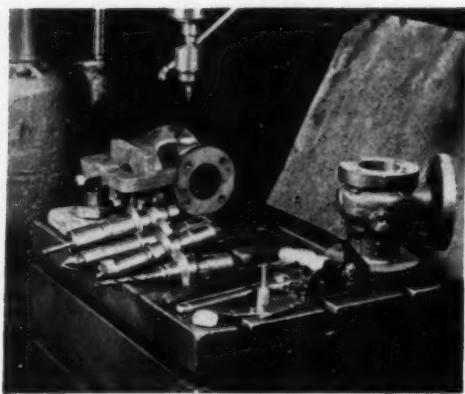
DRILLING AND TAPPING A $1\frac{1}{2}$ -IN. STEEL VALVE BODY FOR GLAND STOP SCREW ON AN UPRIGHT DRILL RESULTED IN A RATE OF 12 BODIES PER HR
